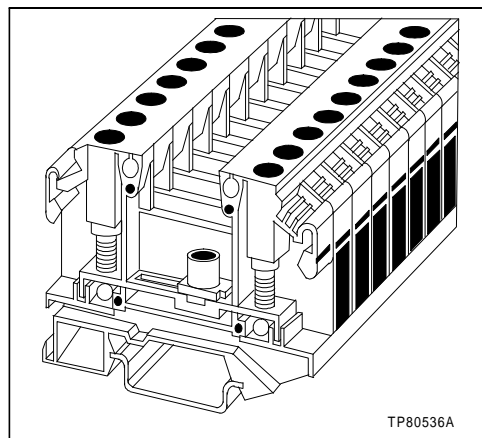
Weidmuller 6-32 Screw Terminal Block
